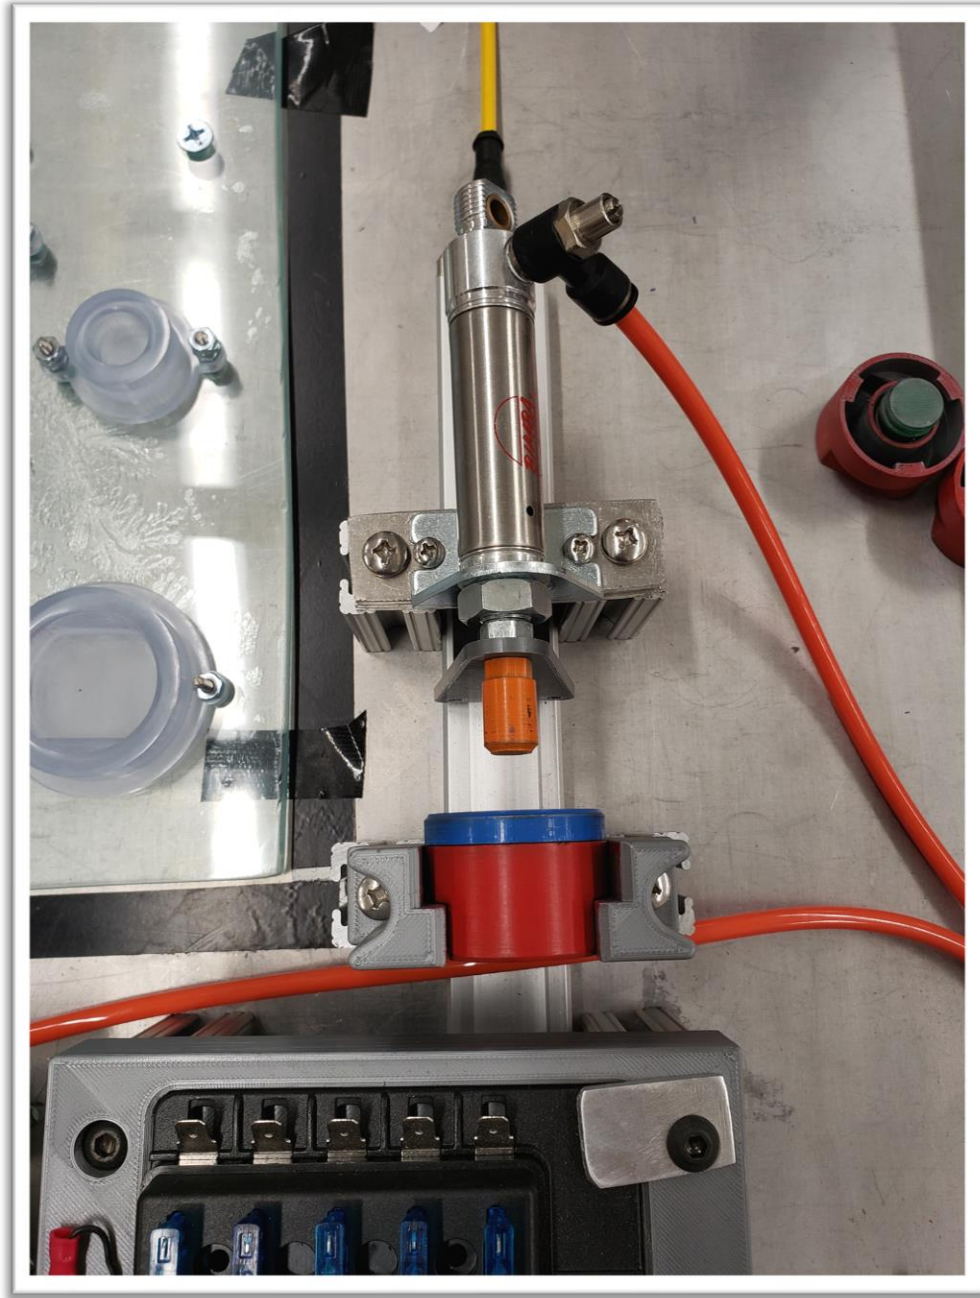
Completed assembly in quality inspection fixture & pneumatic piston connected to the air supply.
